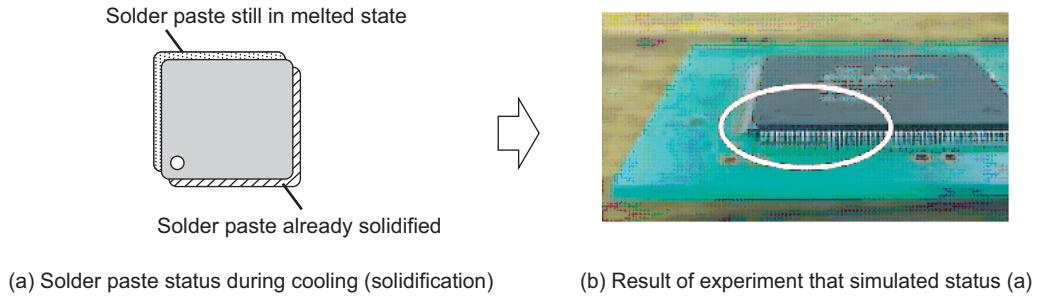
Lifted leads due to great difference in solder paste solidifying speed
